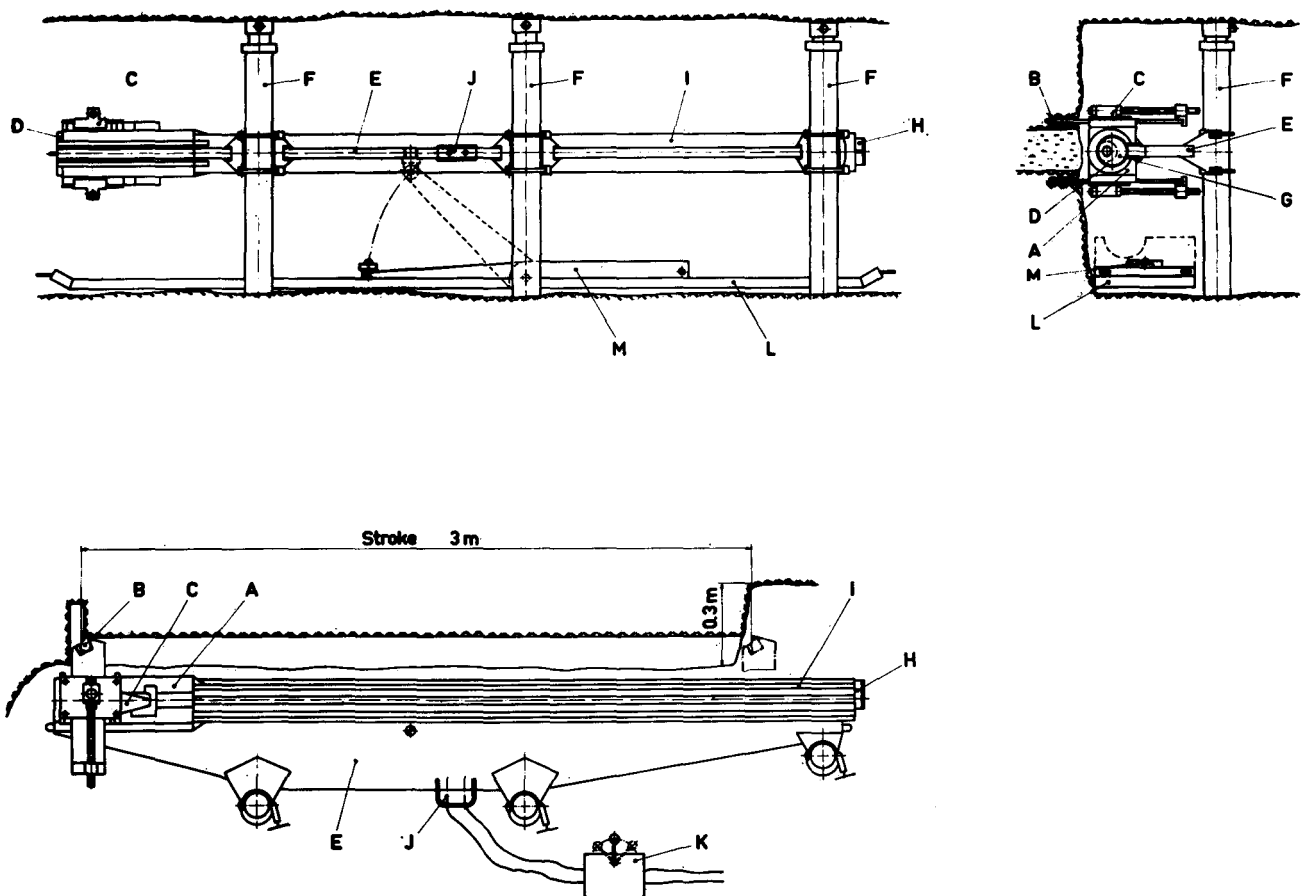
Elevation, section and plan of the first prototype rockcutting machine, installed at a stope face. A is the saddle with tools B and tool feed C. D and E are the bed and web of the frame mounted on hydraulic props F.
